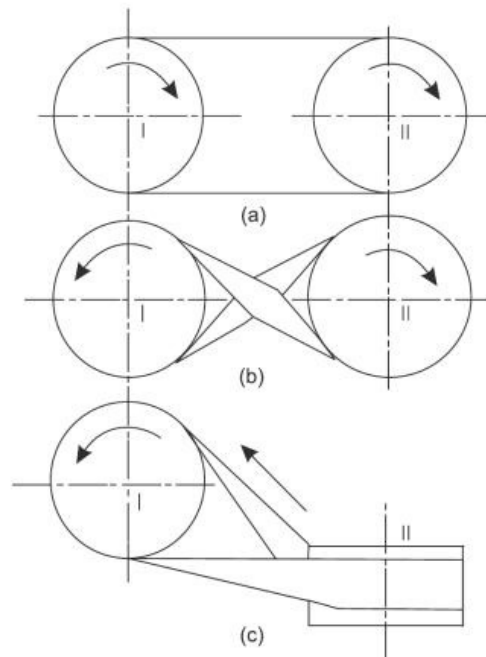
Belt drives: (a) Open-belt arrangement (b) Cross-belt arrangement (c) Quarter-turned arrangement
